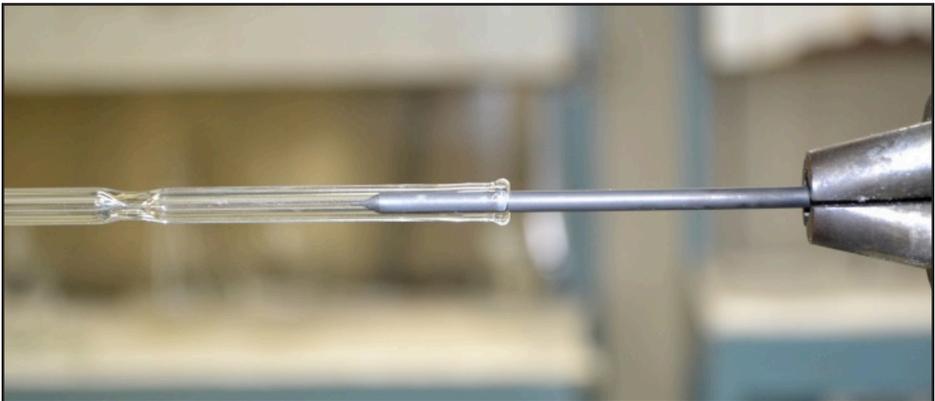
Removing the mandrel from tube after vacuum forming process
